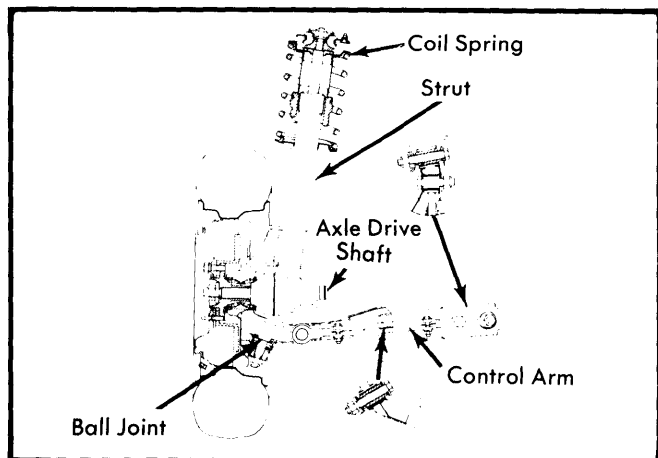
Sectional View of Fiat X1/9 Rear Suspension Assembly
